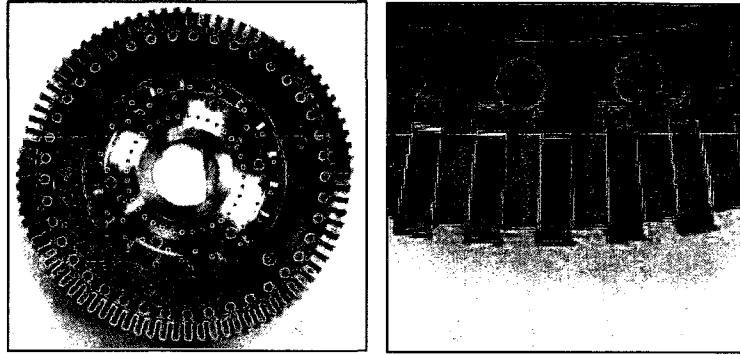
A press-quench die. (a) Front view of a press-quench die; (b) magnified view of the die edge. *Courtesy of Toledo Machining Plant, Toledo, Ohio U.S.A.
